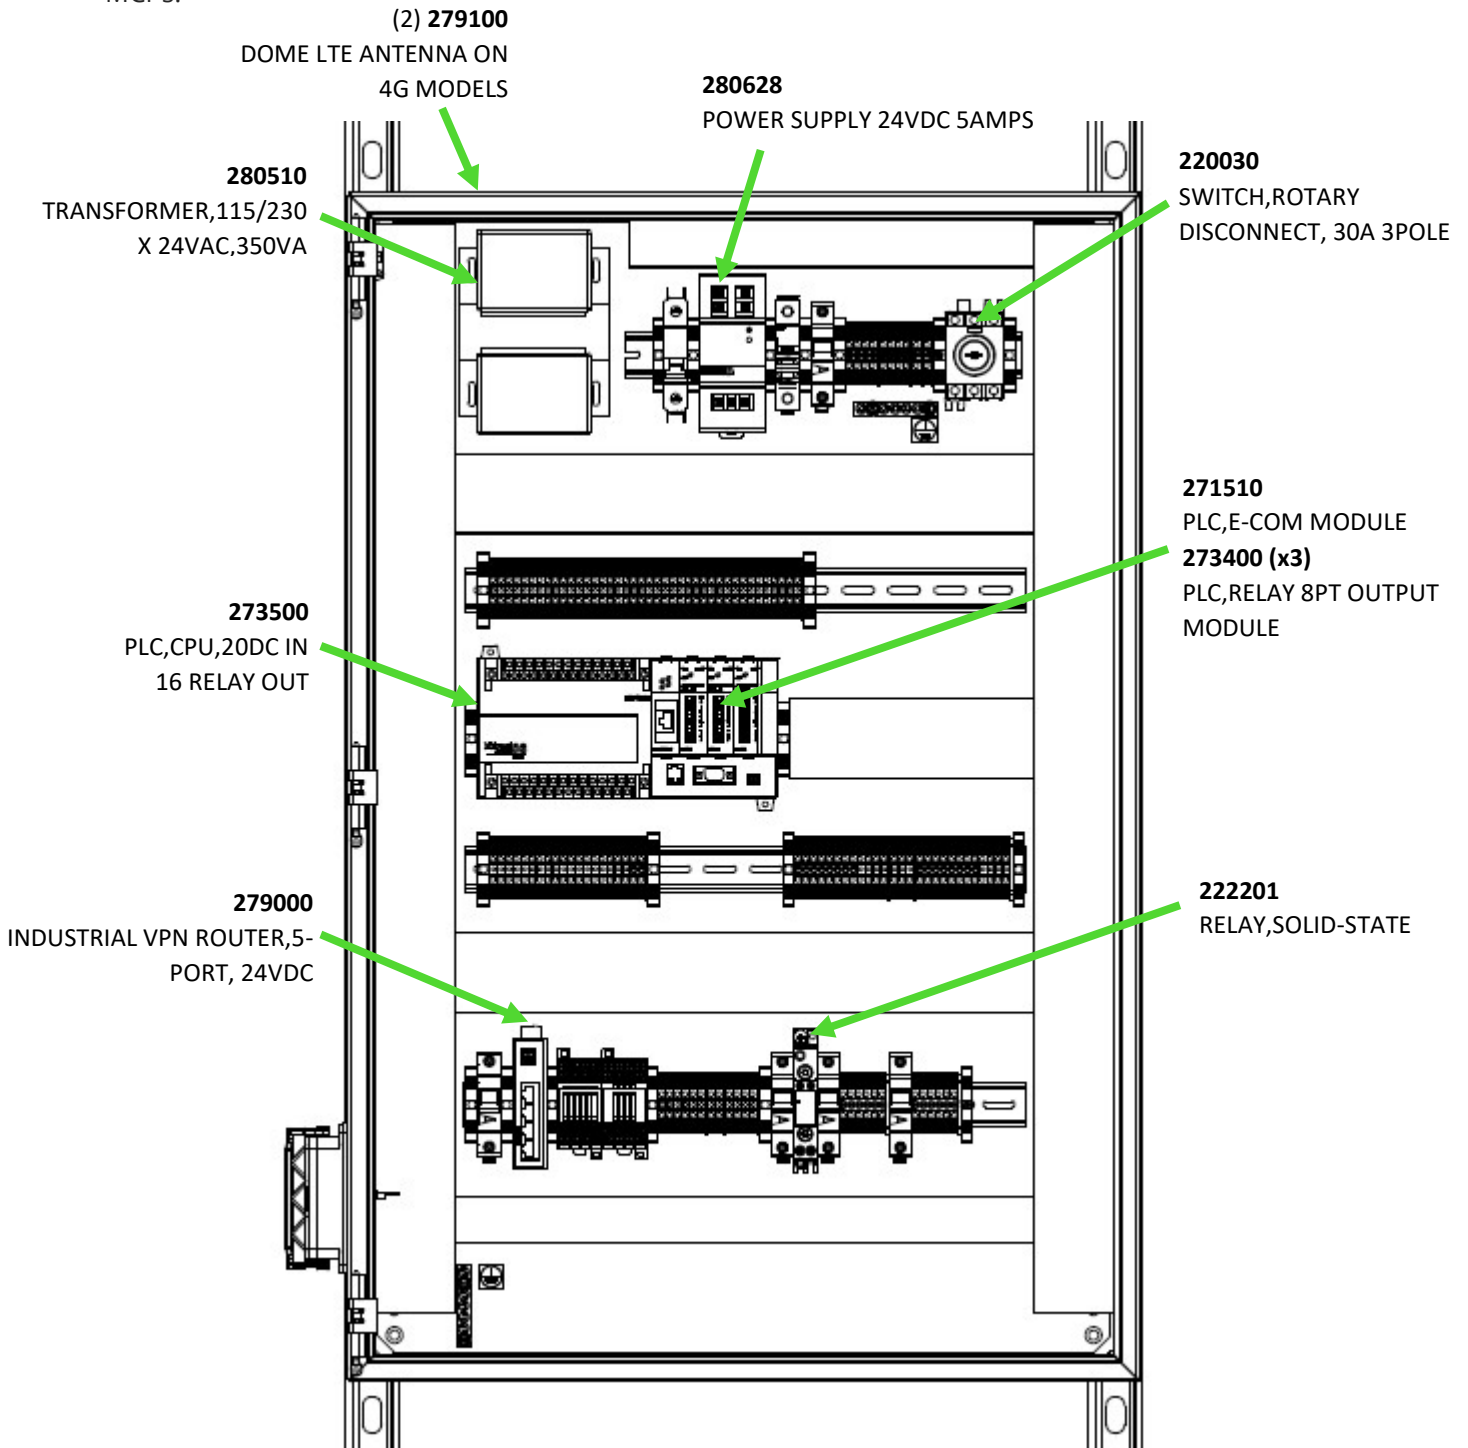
095131-20-40 Single PLC MCP Assembly Layout
